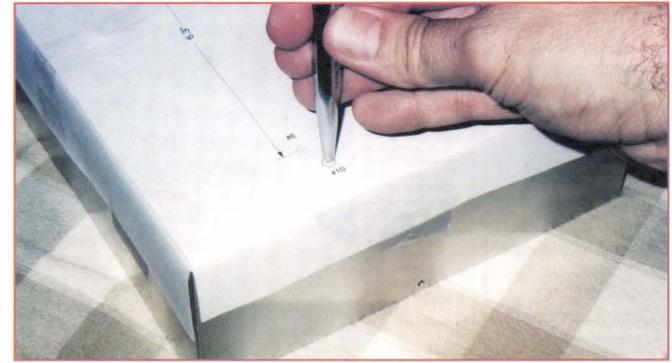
Taping a full-size printout of the front panel plans to the chassis speeds hole location and center punching. Be sure to check the accuracy of the dimensions on the printout, though. Most laser printers and photocopiers don't print exactly at the same scale for both length and width, and the resulting drawing may be slightly stretched or squeezed in one direction or both.
